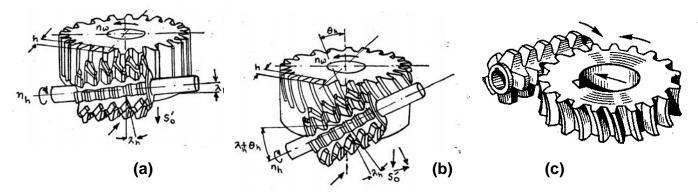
Generation of external gear teeth by Hobbing : (a) straight tooth (b) helical tooth and (c) worm wheel
